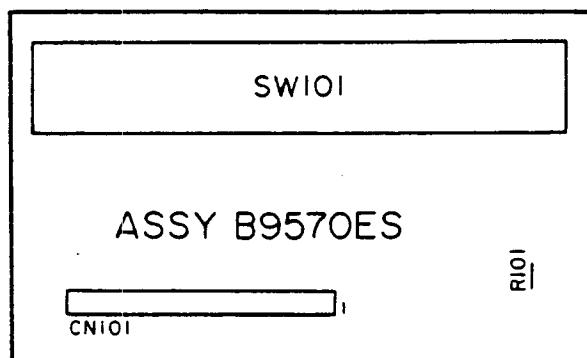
Switch PCB Ass'y: B9570ES Components Location Diagram.
